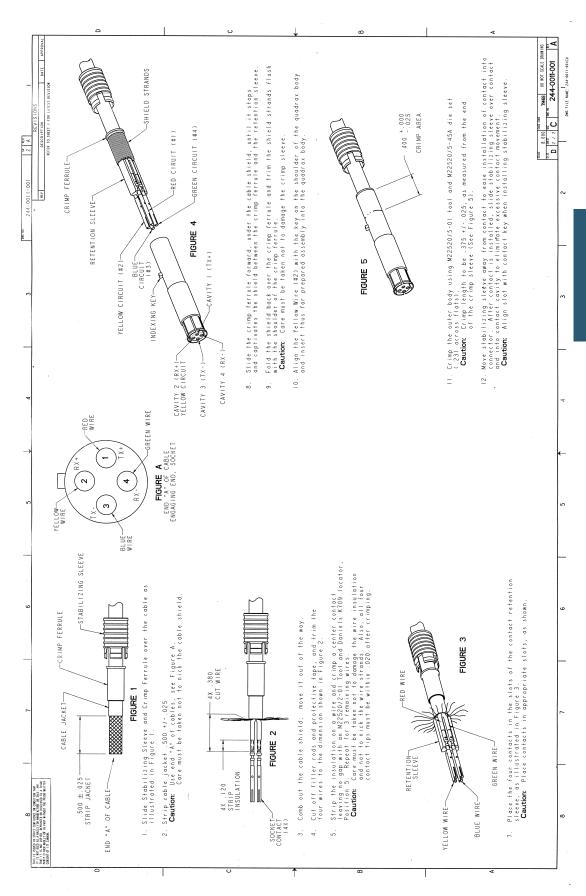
Contact Assembly: Quadrax Pin size 5 special: ITT Cannon 244-0011-001 (Continued)
